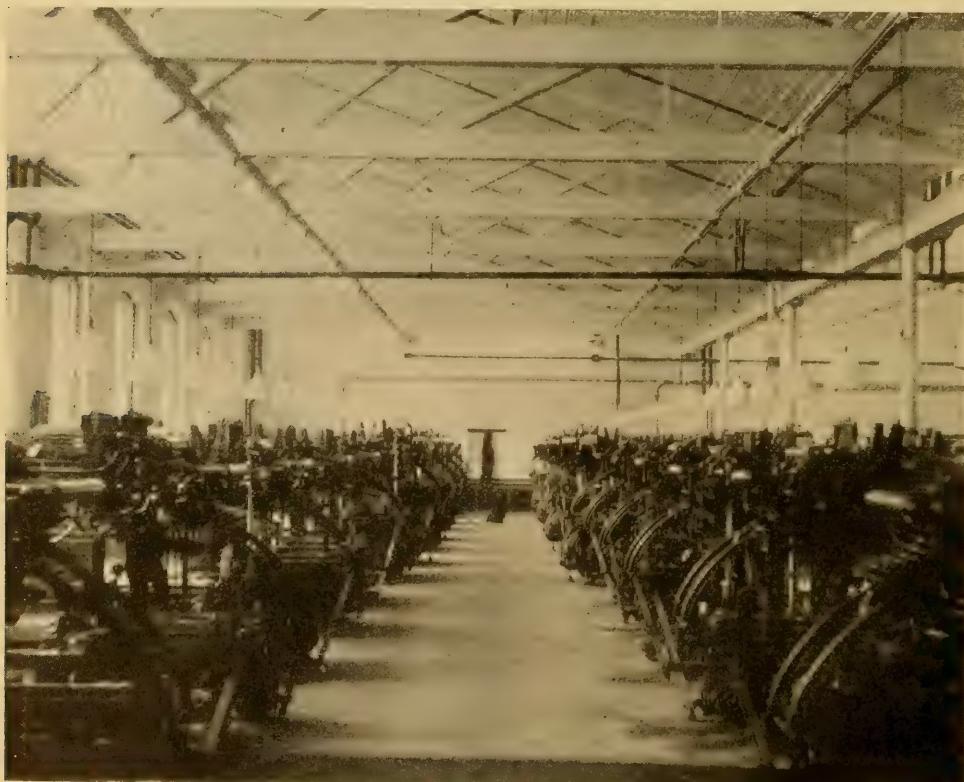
GENERAL VIEW, SHOWING LIGHTING EQUIPMENT OF WEAVING ROOM, NEW MILL.
